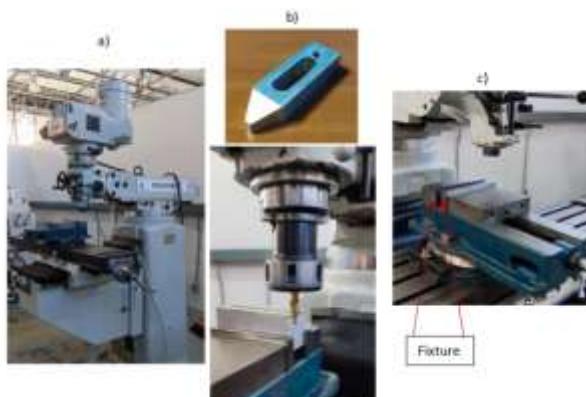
(a) UPIIG-IPN milling machine (b) types of machining performed with the milling machine (c) fixture type tool in the milling machine [1]
